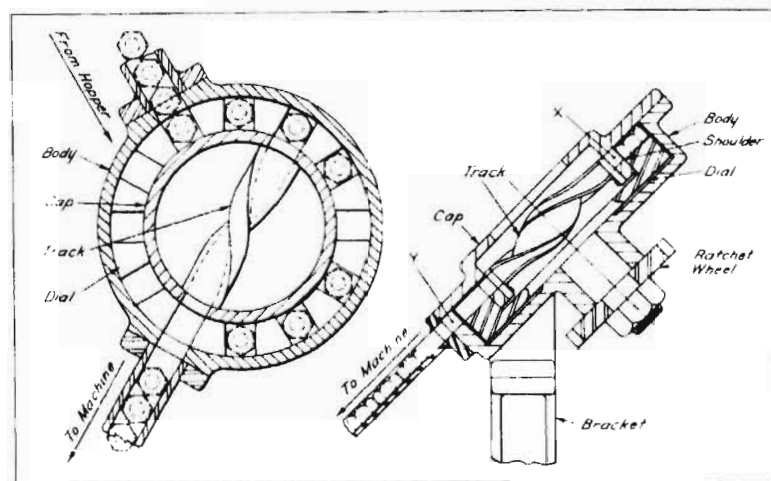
Selector mechanism for inverting improperly positioned hexagonal nuts prior to delivering them to an automatic machine.
